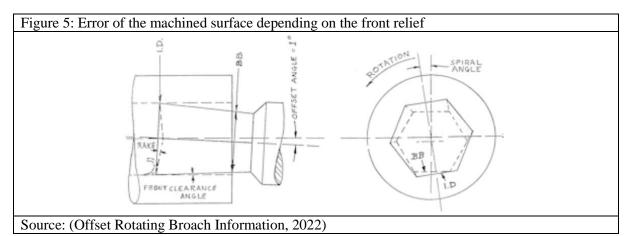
shows the geometry of the tool. The figure illustrates that the tool has a rake angle θ_r , which determines the manner of formation and removal of chips on the front surface like other processing methods by chip removal. The Front relief θ_f ($\theta_f = 1.4^\circ \div 1.5^\circ$), the value of the accuracy of the treated surface depends on its value. At a higher value for θ_f , a spiral shape of the treated surface in the longitudinal direction is obtained (Offset Rotating Broach Information, 2022) (Fig. 5).
